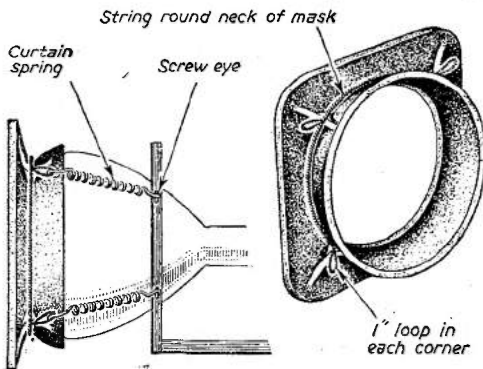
A simple arrangement making use of the rubber mask to hold the tube in position in the arrangement shown in Fig. 3. The "springs" are short lengths of flexible curtain rod.
